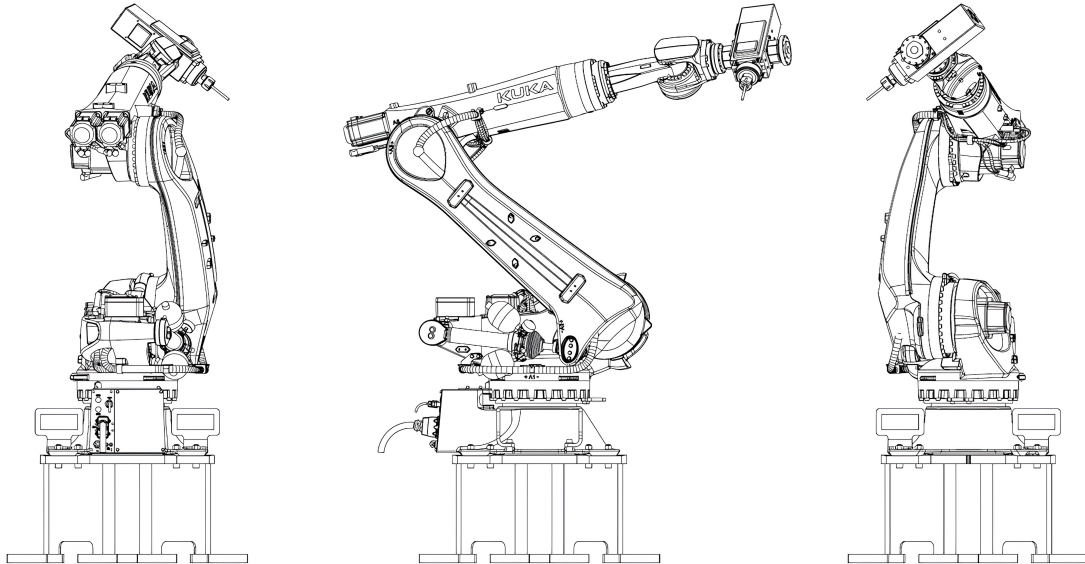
Final robot CAD assembly. Courtesy of KUKA.
